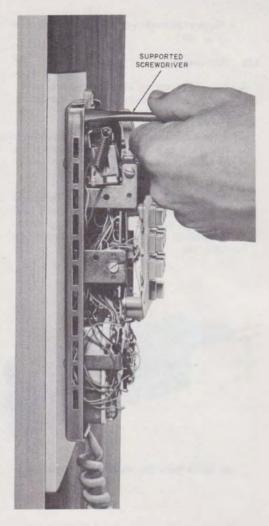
Tightening Fasteners Which Support Telephone Set and 182B Backboard
